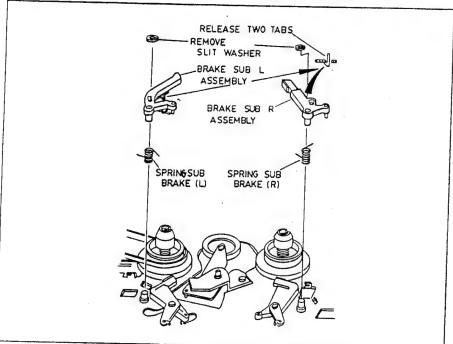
Brake Sub (R) Assembly and Brake Sub (L) Assembly Removal
